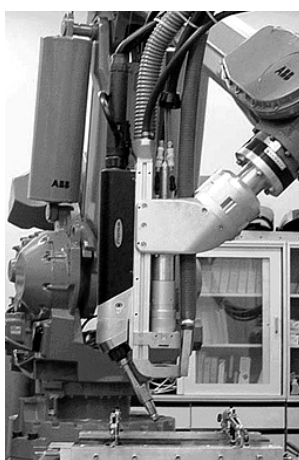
Nd:YAG laser-MIG hybrid welding system.
